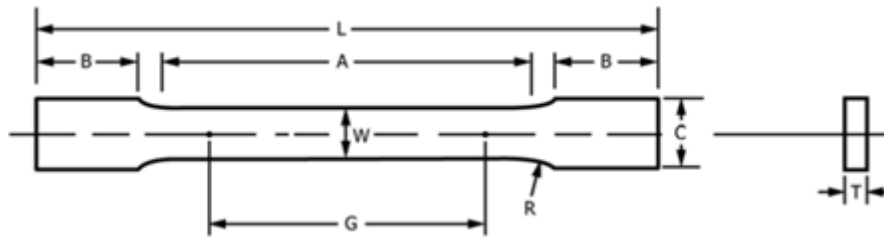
Flat tensile specimen (A=57 mm, W=12.5 mm, B=75 mm C=20 mm, R=12.5 mm).
